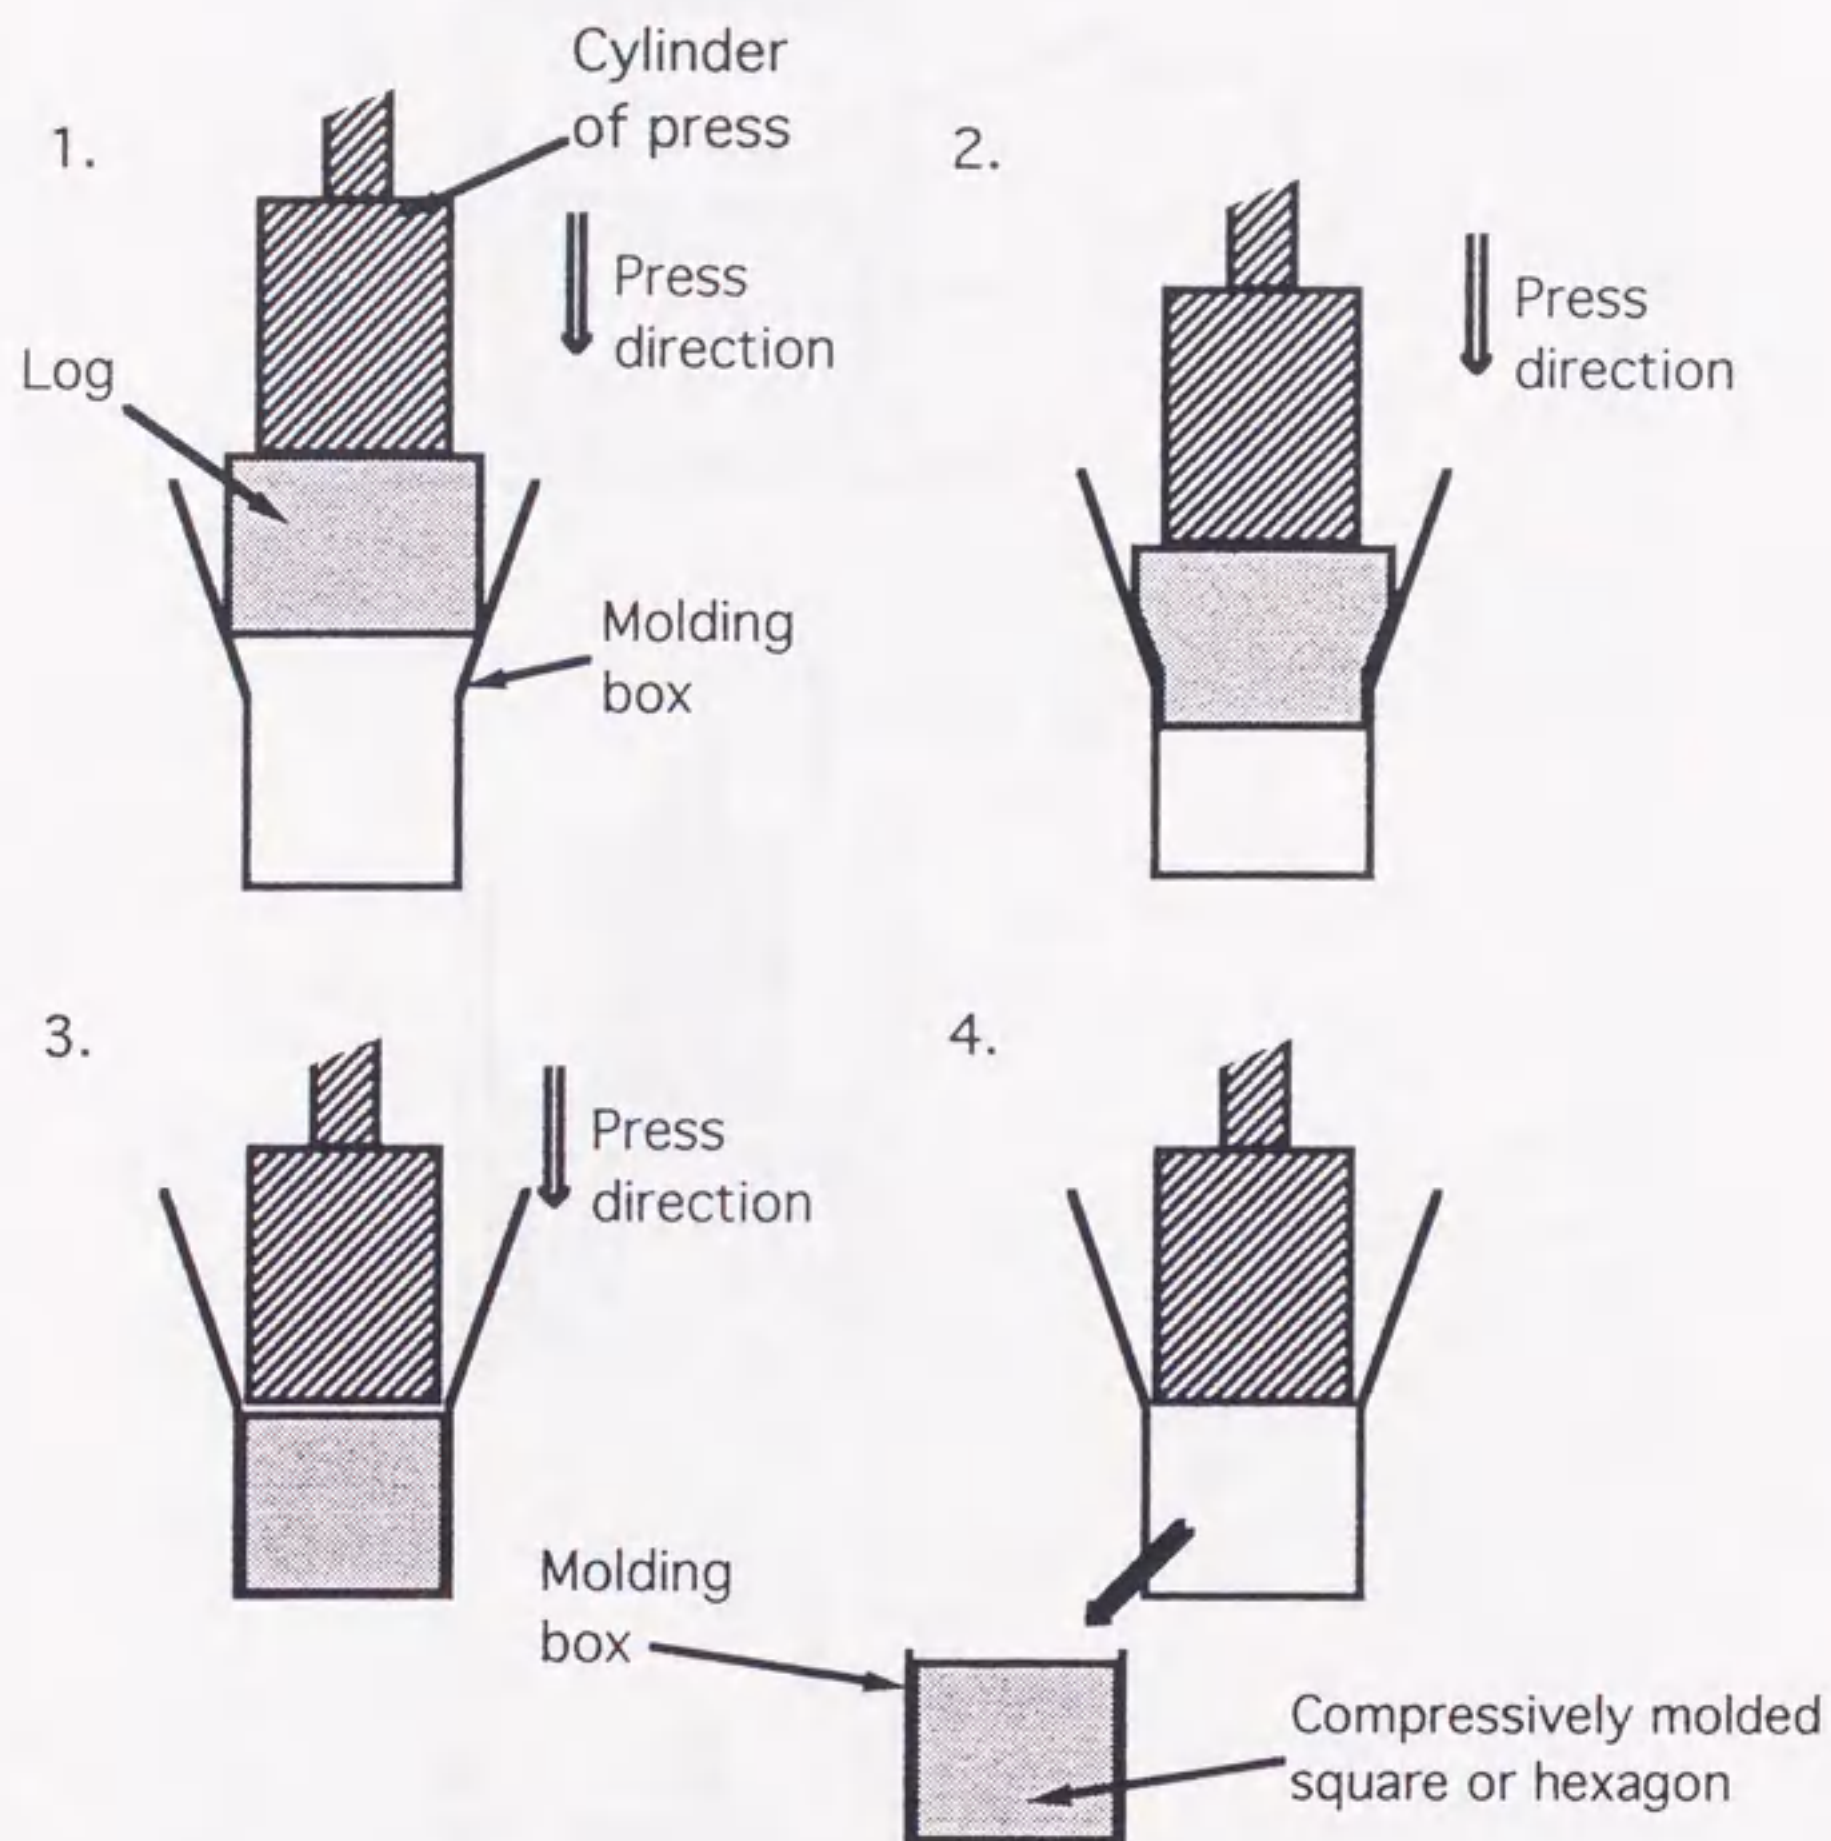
The manufacturing process of compressively molded square and compressively molded hexagon under high temperature steam atmosphere.
